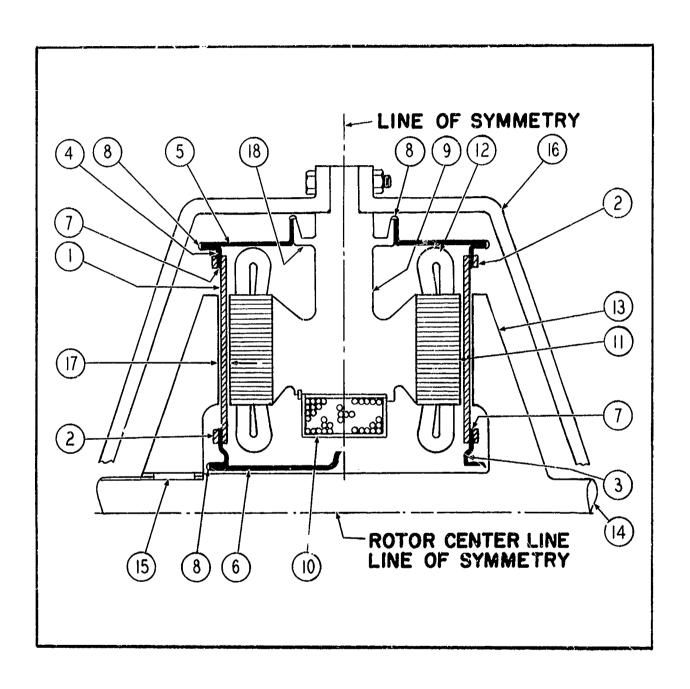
Bore Seal Assembly, Axial Gap Inductor Generator
